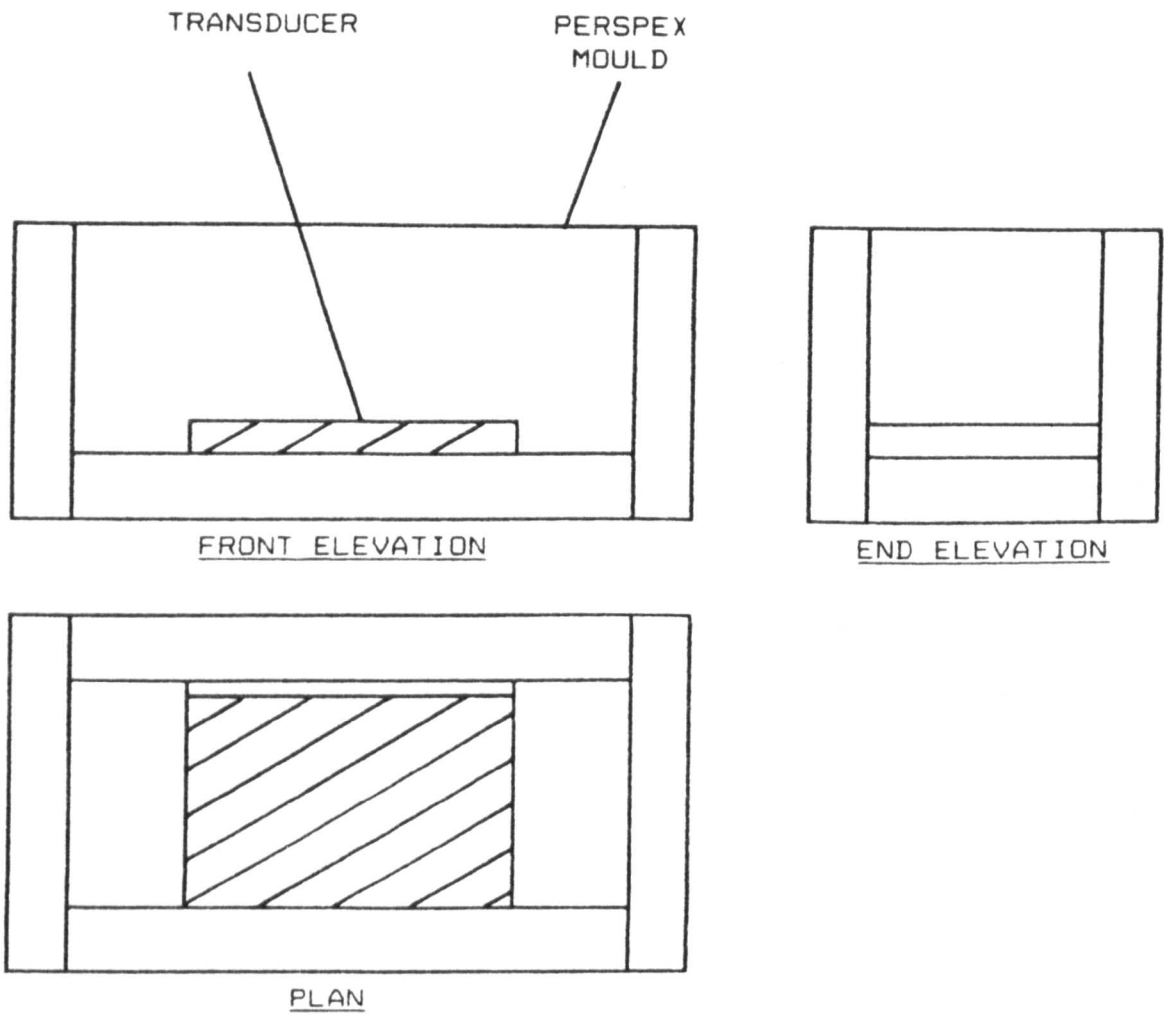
Drawing of the transducer in the perspex mould. The aluminium loaded epoxy is poured into the top of the mould.
